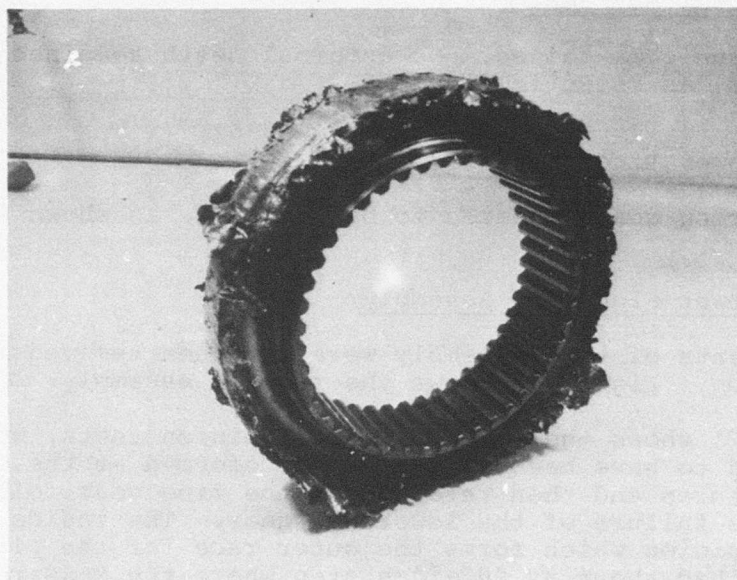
Lower sun gear following 4.0-hour emergency lubrication run.
